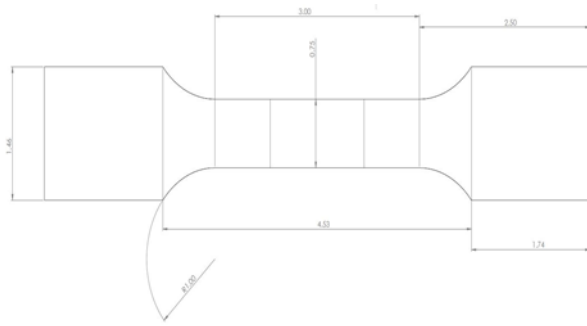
Drawing of cross weld tensile sample geometry.
